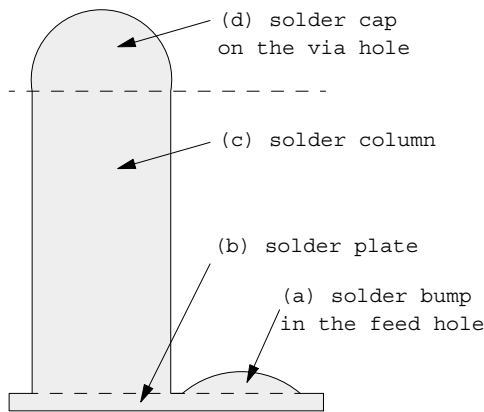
Cross section of the solder geometry in the solder pump after reflow. The final solder column extrudes beyond the outlet of the via hole.
